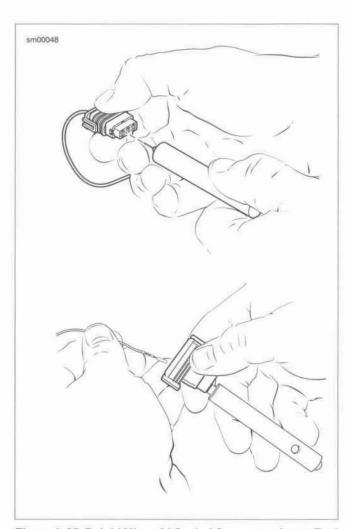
Delphi Micro-64 Sealed Connector: Insert Tool and Remove Terminal
